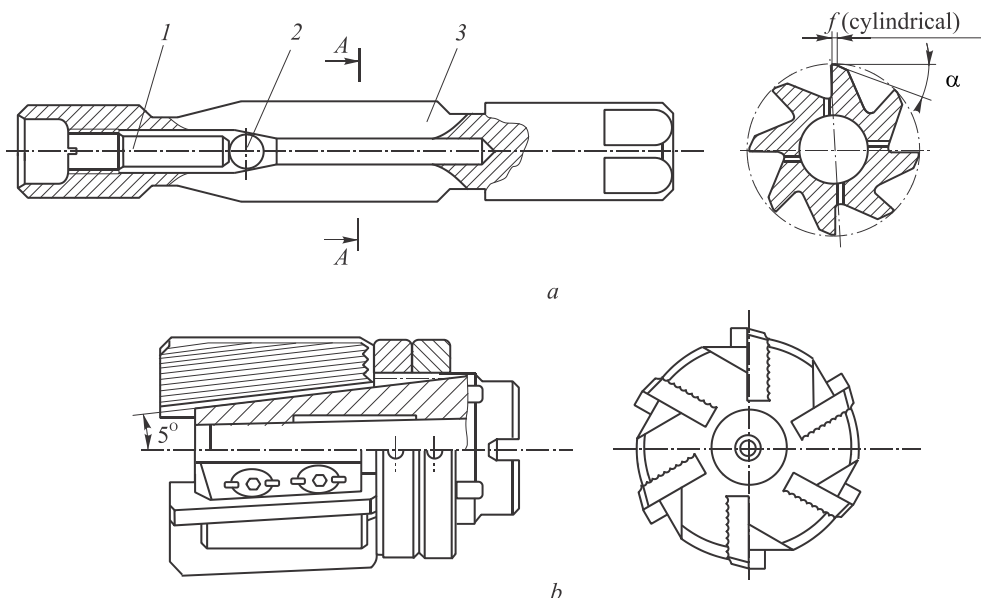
Adjustable reamers: (a) hand-type; (b) shell indexable machine reamer
